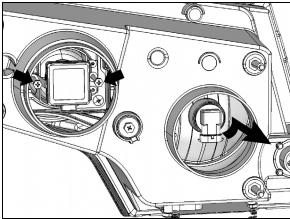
HEADLIGHT ASSEMBLY REAR VIEW
